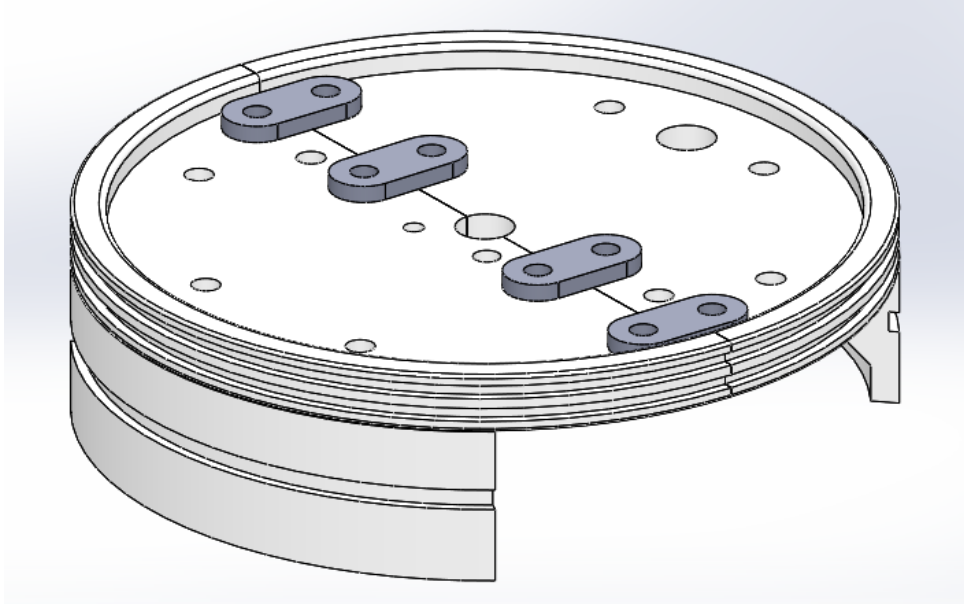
Two Parts of the Piston Assembled with Piston's Guides (Isometric View)
